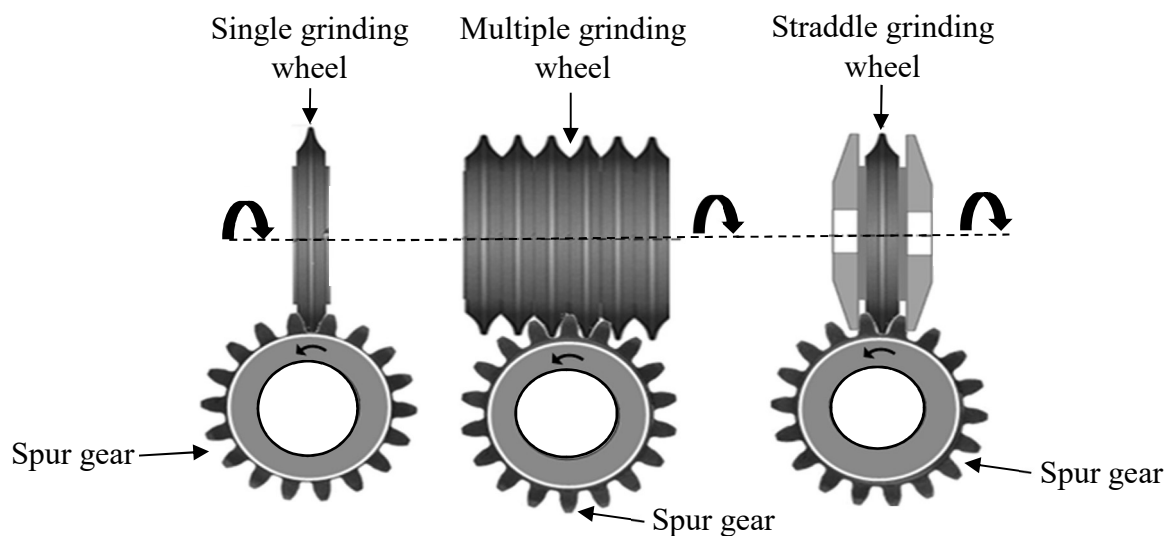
Different type finishing of a gear by gear grinding process [6]
